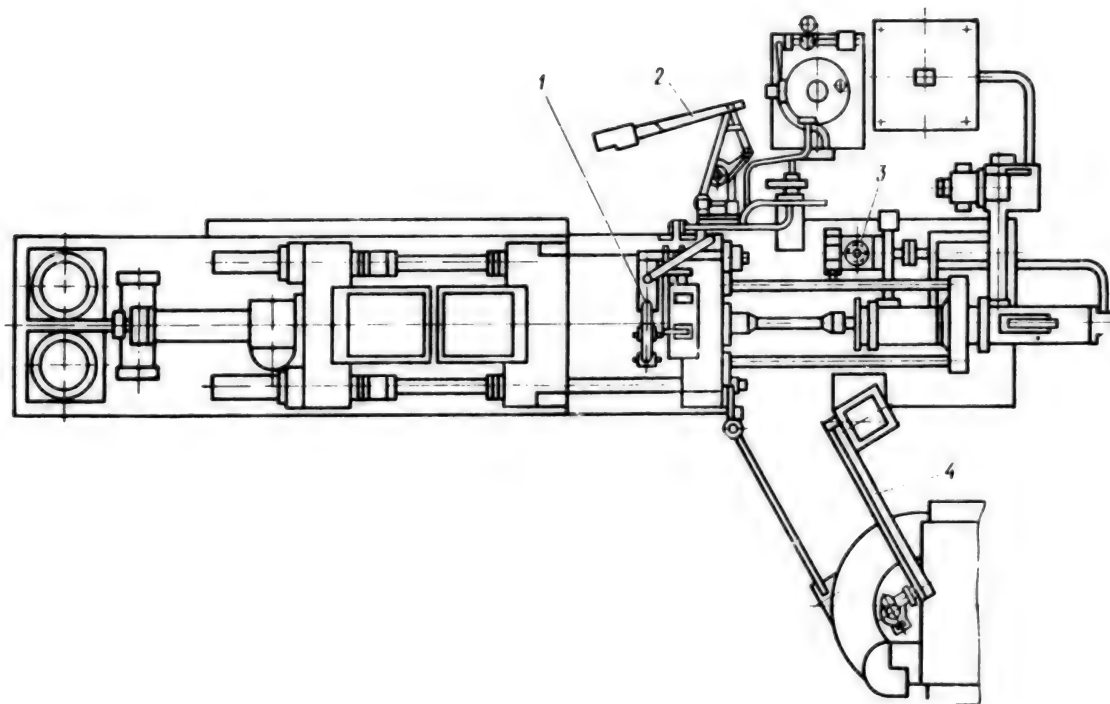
Diagram of Supplying Pressure Die Casting Machine With KOM Near-Machine Mechanization Complex
